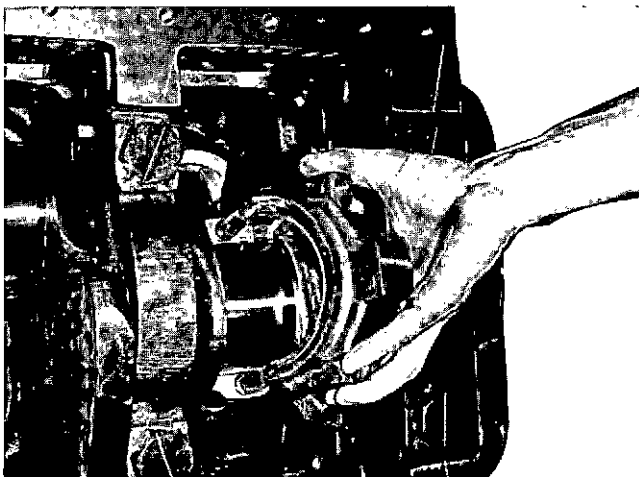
, V414218. Installing connecting rod bearing and cap
